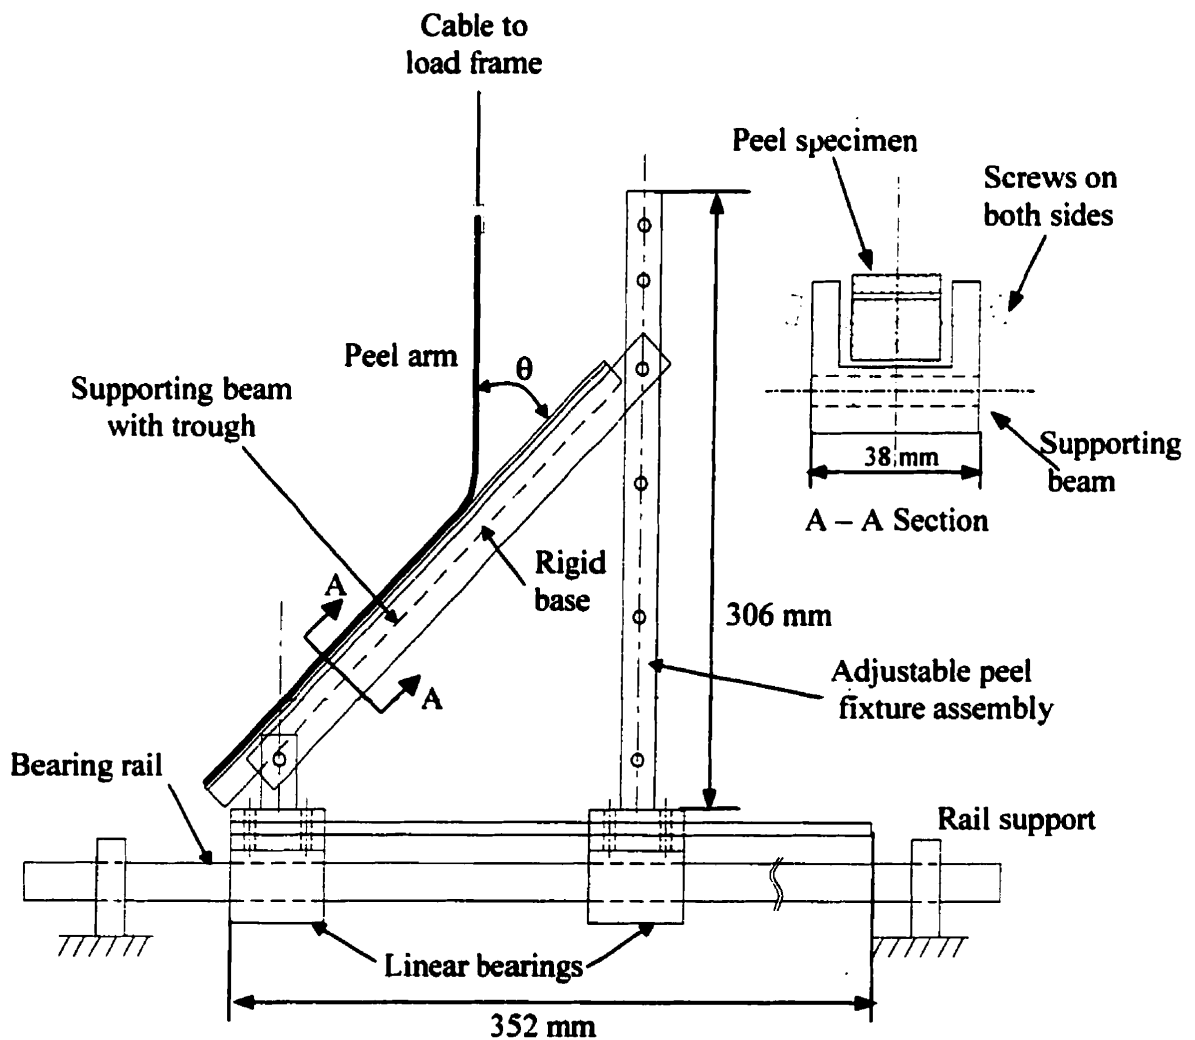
The schematic of peel jig for various tests at constant peel angle θ
